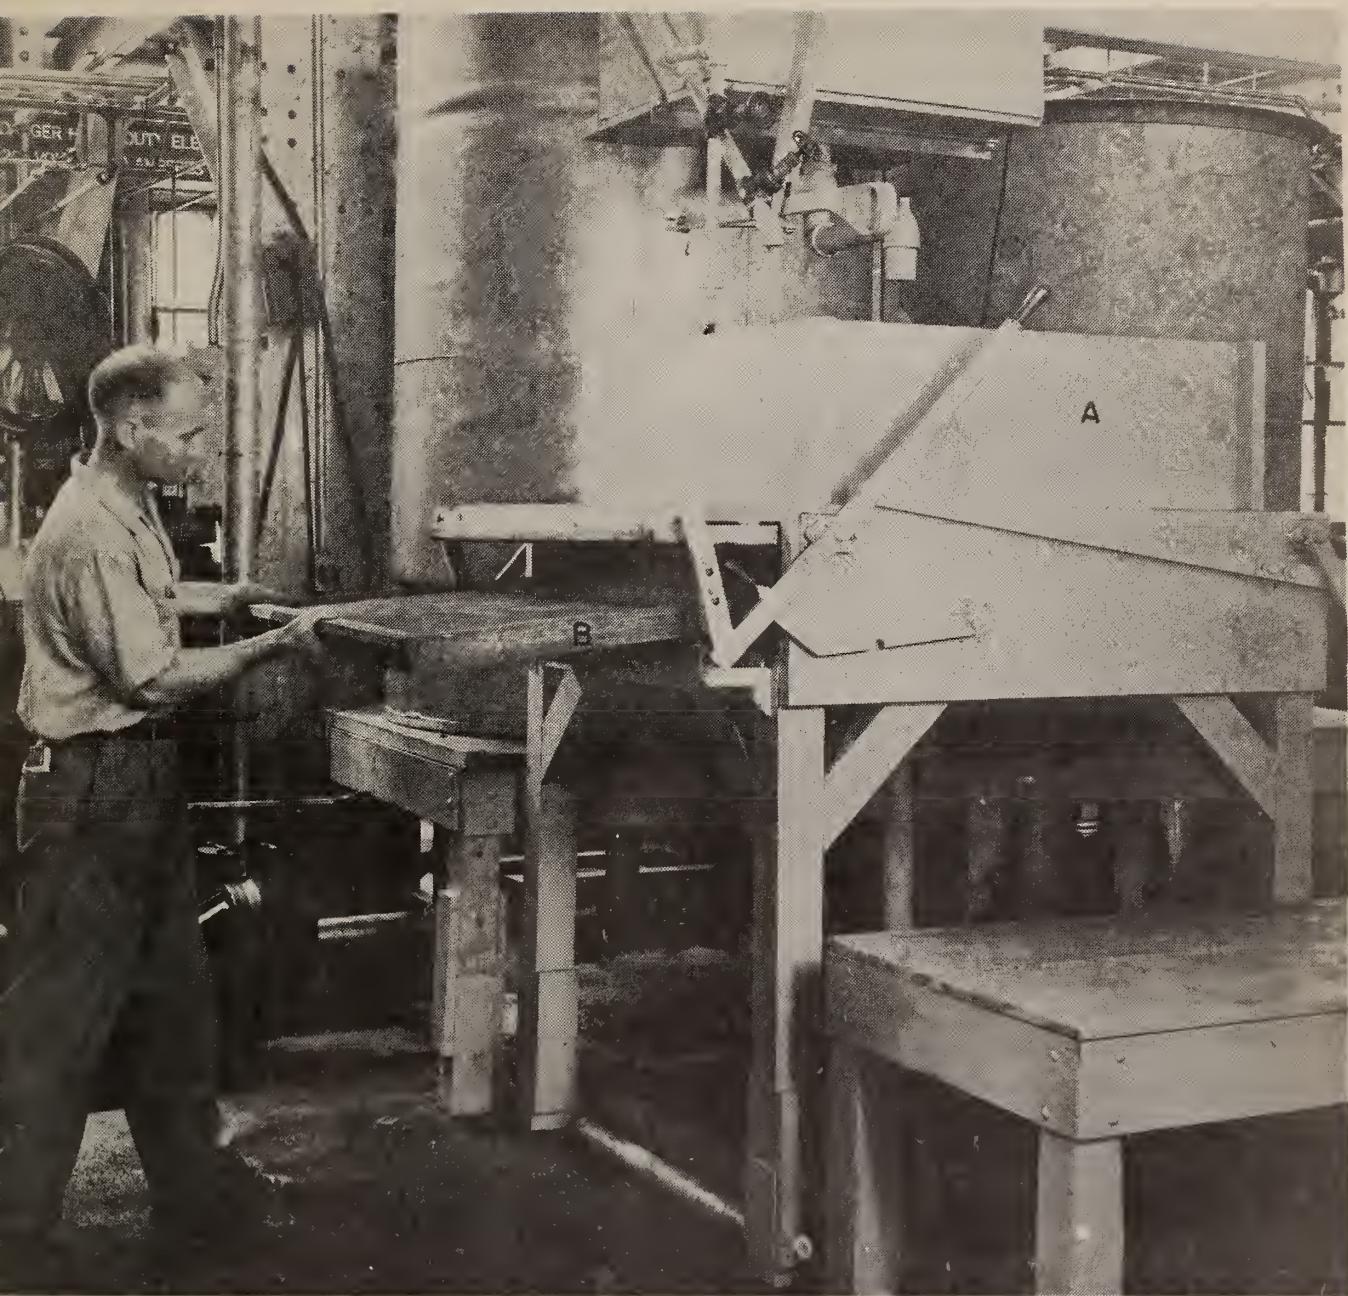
Pilot plant board machine: board machine (A), screen on which board is formed (B).
